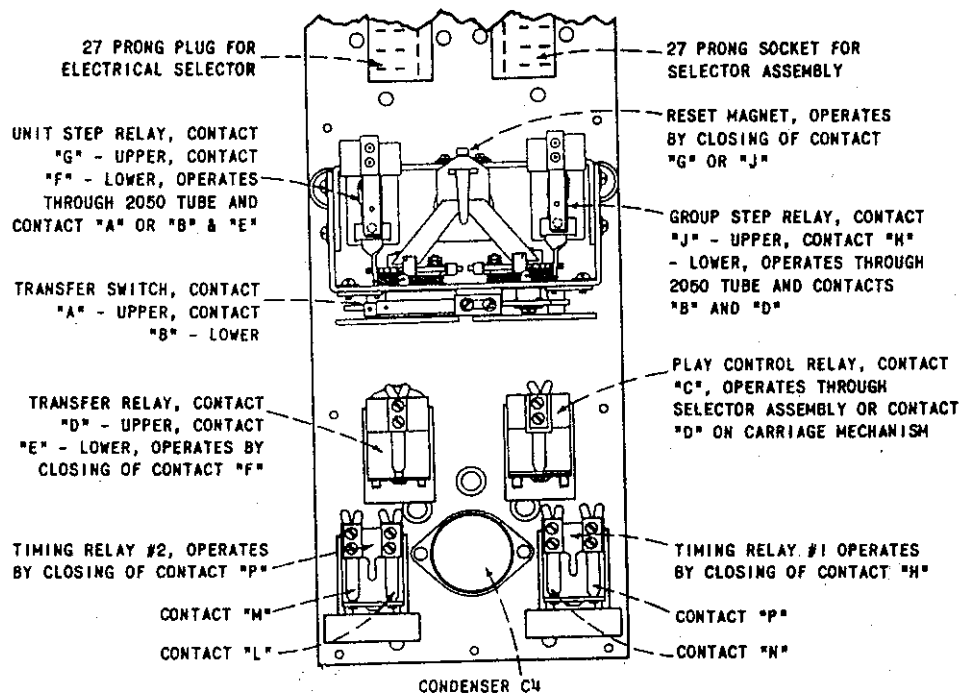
TOP VIEW OF STEP SWITCH & RELAY ASSEMBLY
